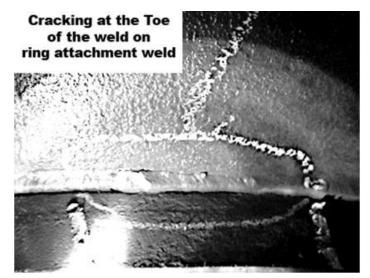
Cracking at Tray Support Ring Weld
